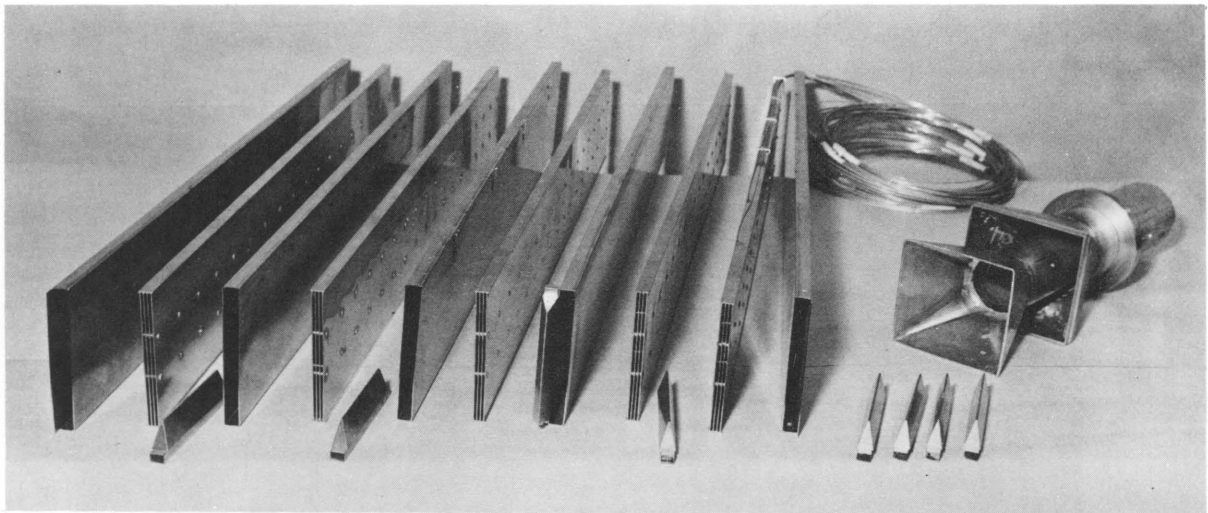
Exploded View of Mockup Instrumented Superheater Fuel Assembly for BORAX-V
